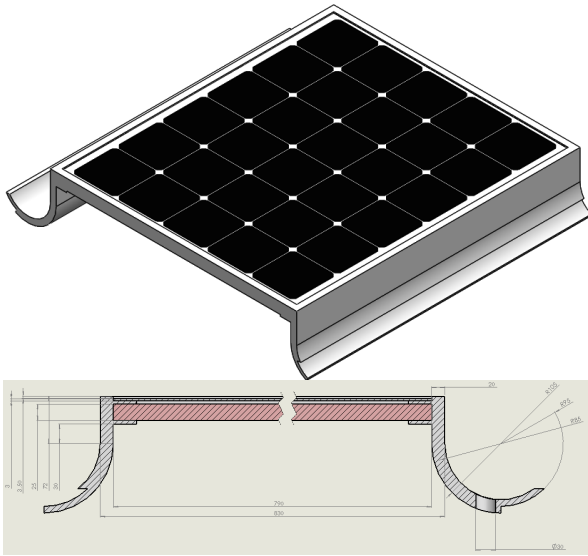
The SCC with an interlock arrangement and sectional view with dimensions.
